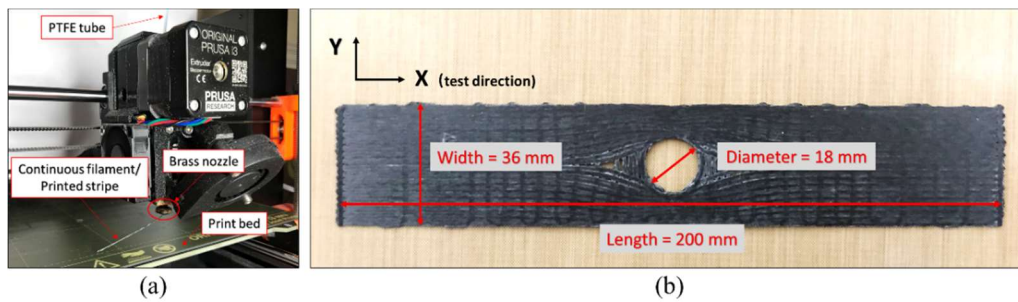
3D printing of continuous CF filament, and (b) a printed open-hole composite preform.
